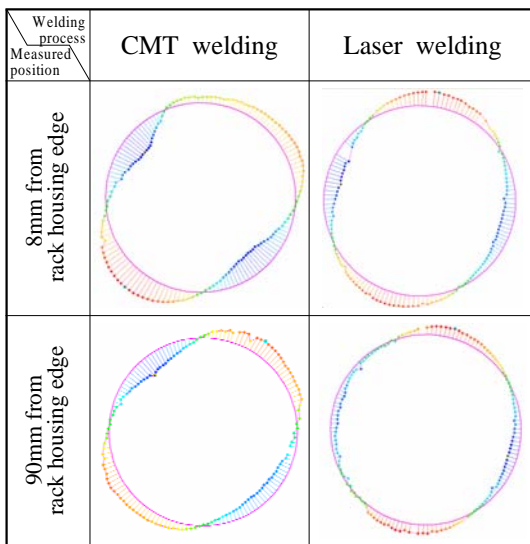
Roundness of rack housing in CMT and laser welding
